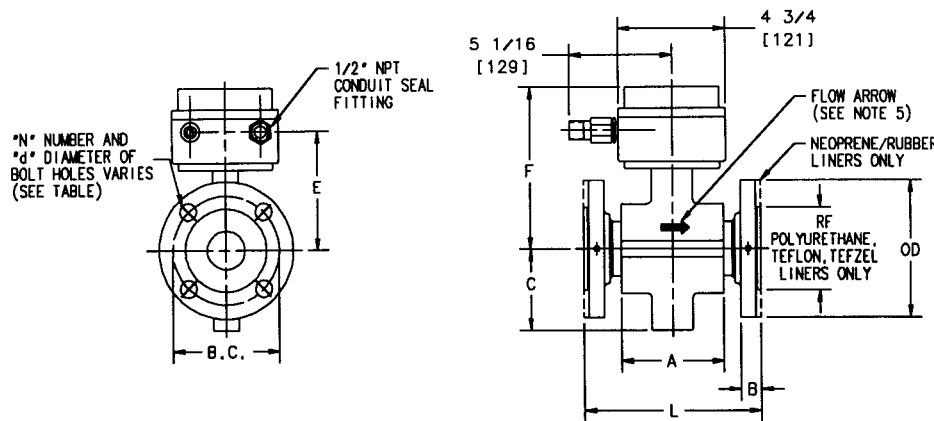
OUTLINE DIMENSIONS, REMOTE CONVERTER WITH DIN FLANGES (10DX3111E/G)
